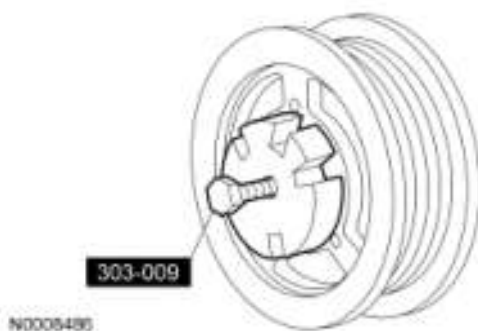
Locating Coolant Pump Pulley And Accessory Drive Belt Idler Pulley Bolts
